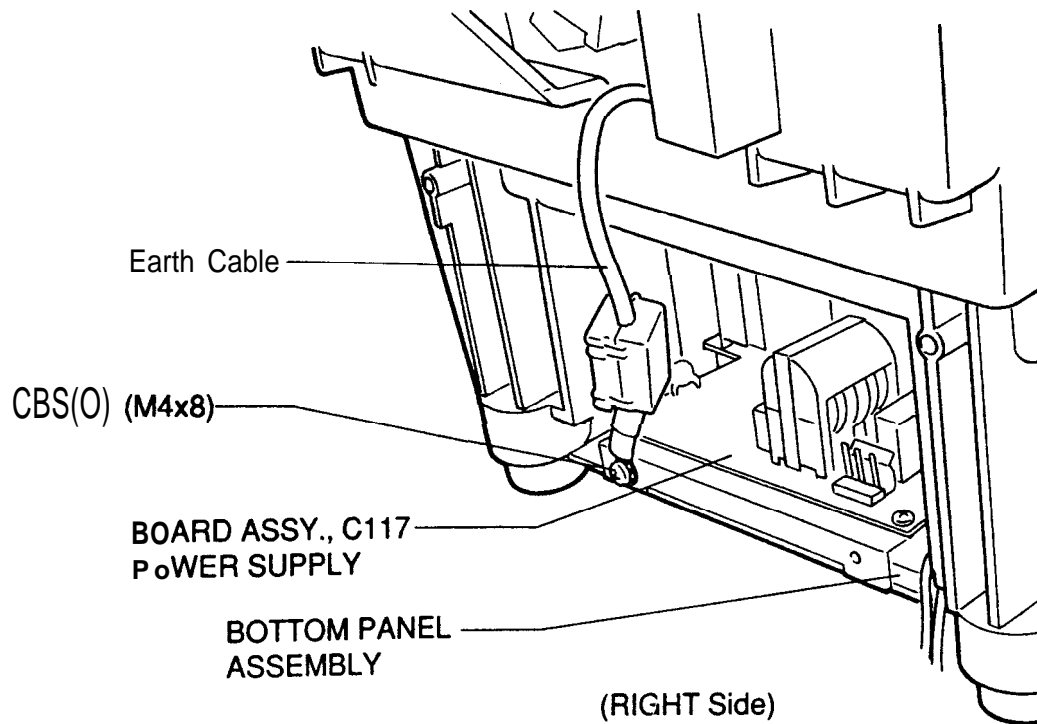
Removing the Bottom Panel Assembly 1
